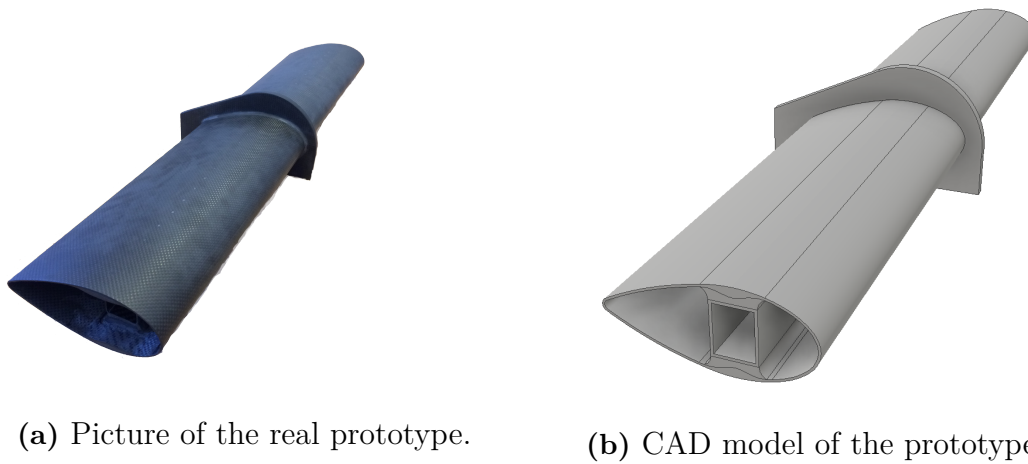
Figure showing a picture of the real prototype together with a CAD model made from the prototype. (a) Real prototype, (b) CAD model of the prototype.
